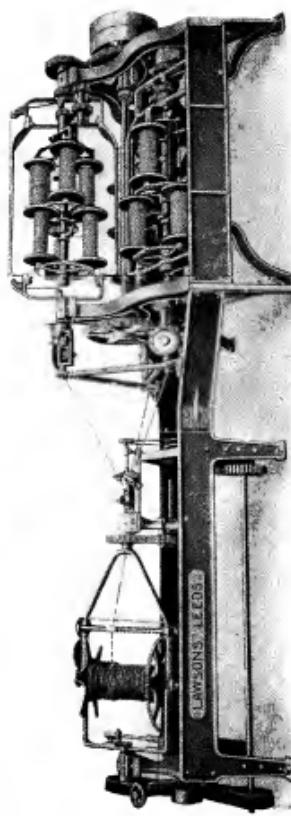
EIGHTEEN-THREAD ROPE-MAKING MACHINE.
